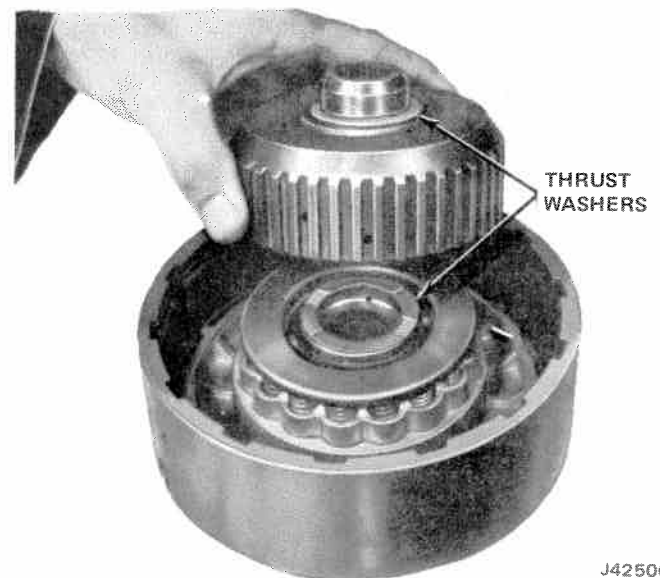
Installing Thrust Washers On Forward Clutch Hub
